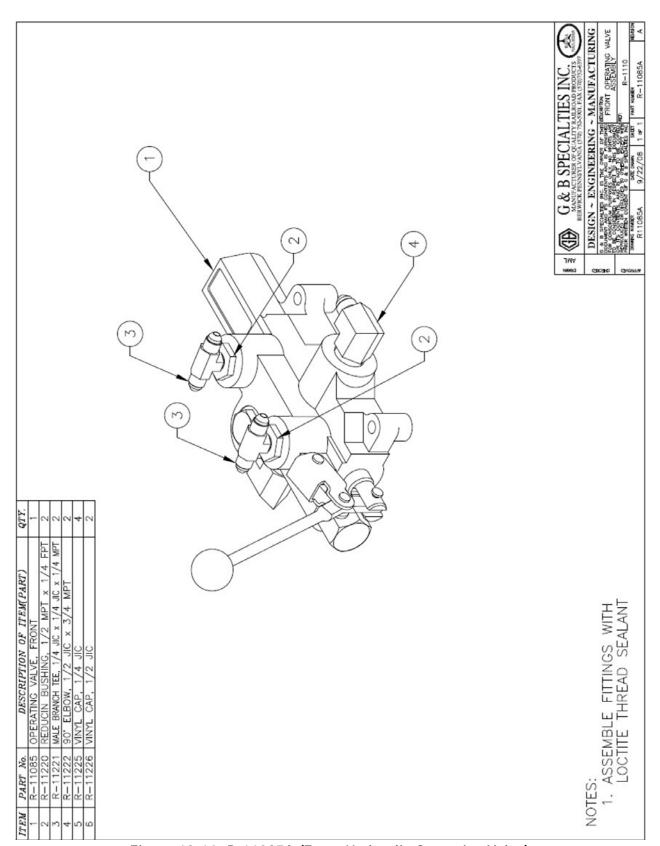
R-11085A (Front Hydraulic Operating Valve)
